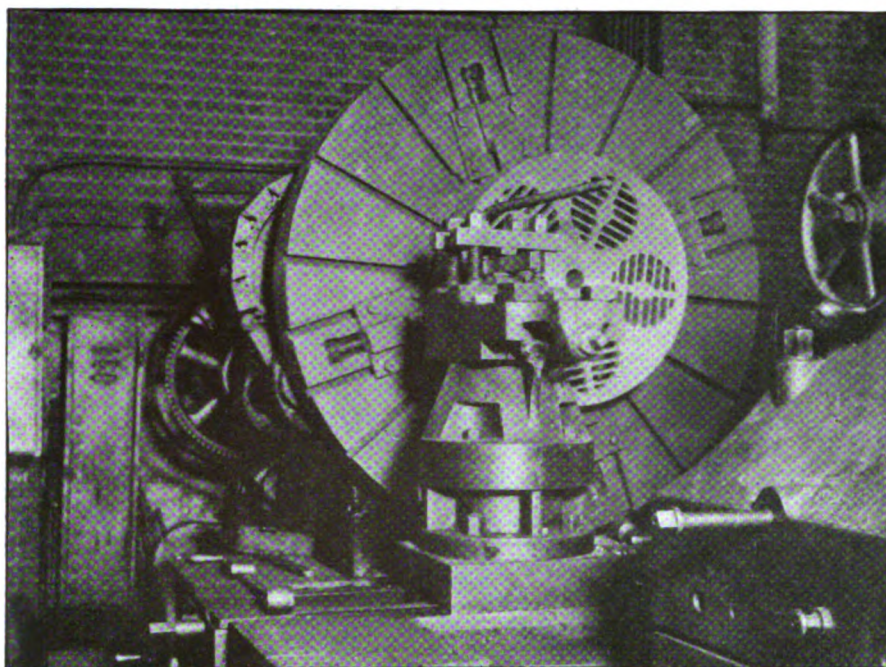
FACING AN AIR PUMP DISCHARGE PLATE IN THE LATHE
